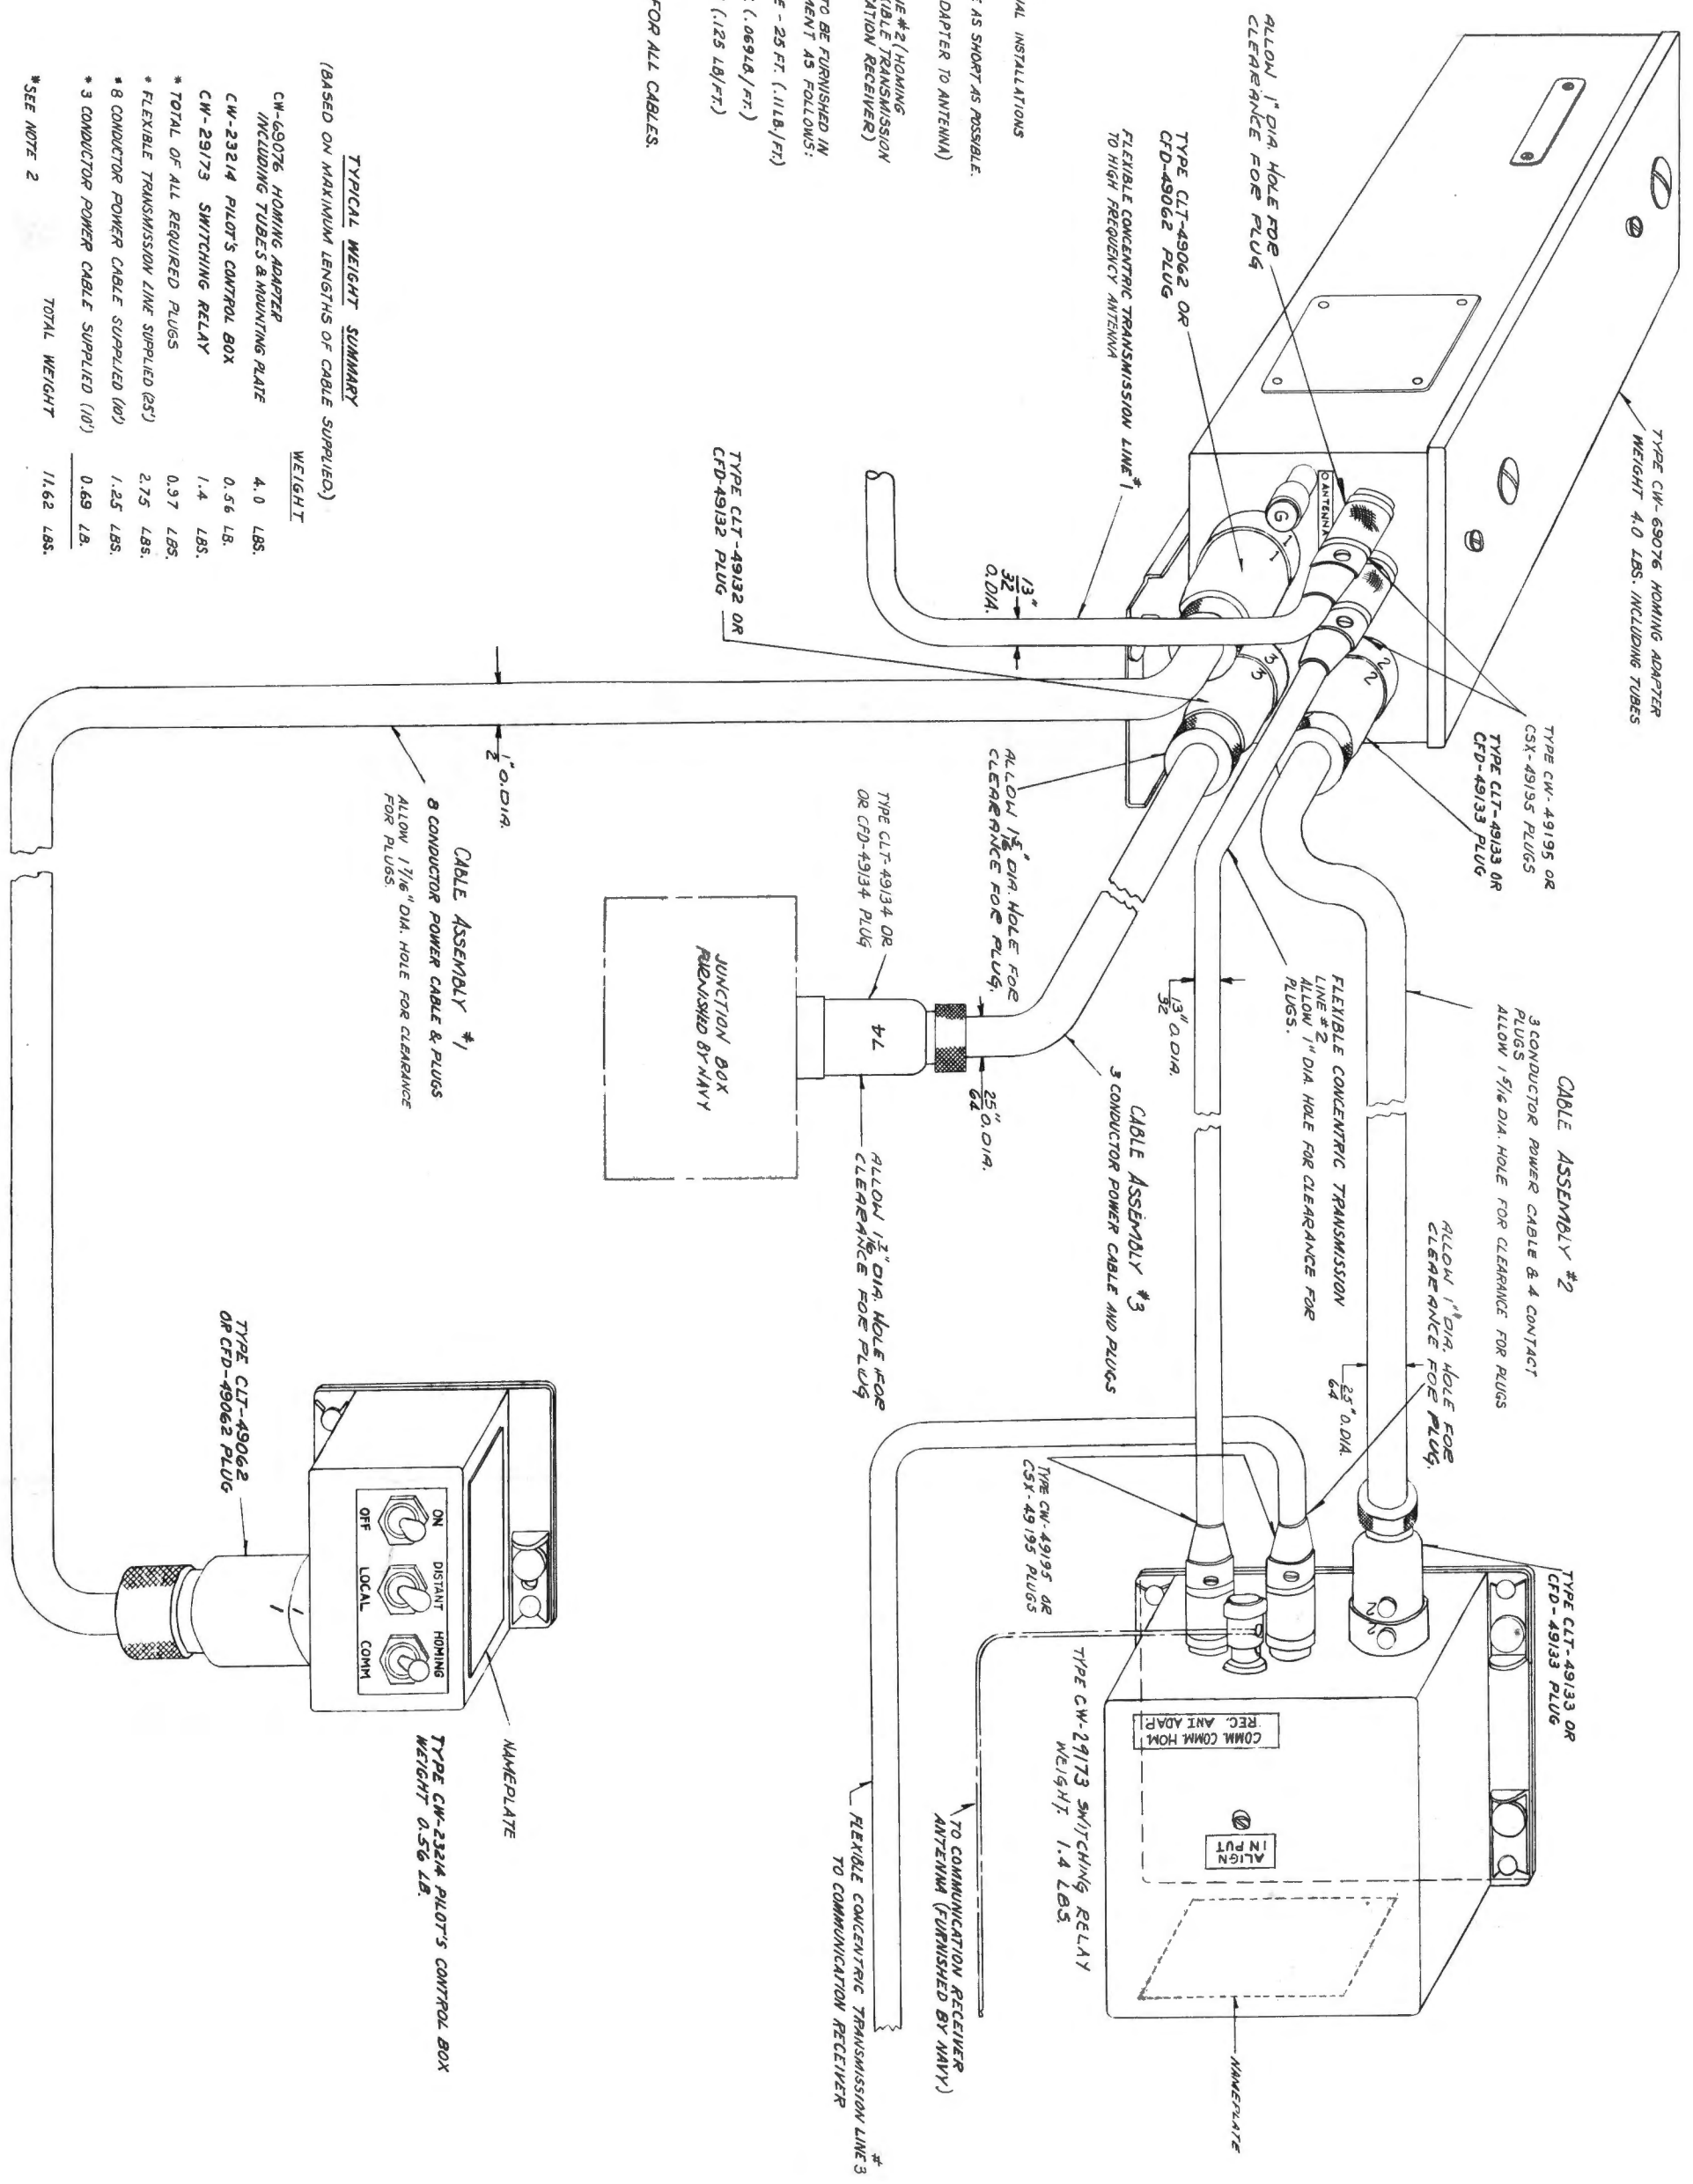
Model ZB-3 Homing Adapter Equipment—Outline Dimensions
